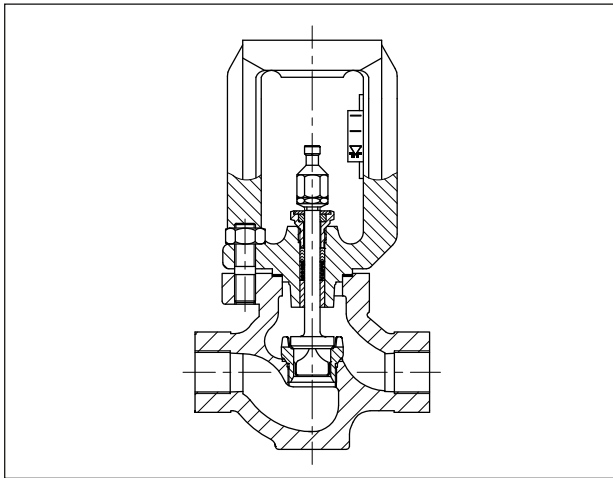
Type 3241 Valve with NPT thread · ½ to 2 NPT
